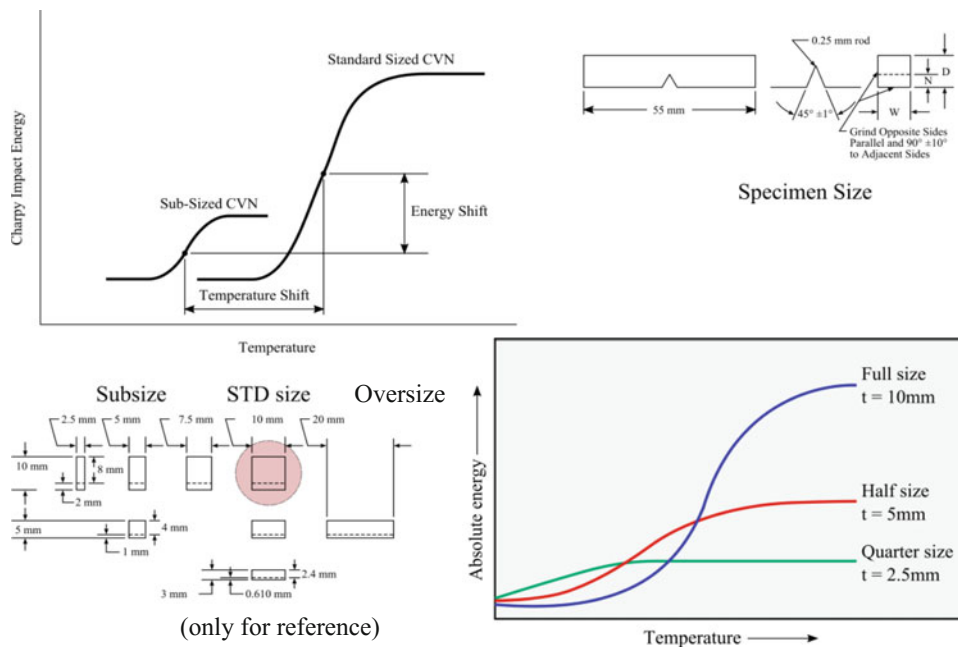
CVN impact test specimen and subsizes. (Source: ASTM A370)
